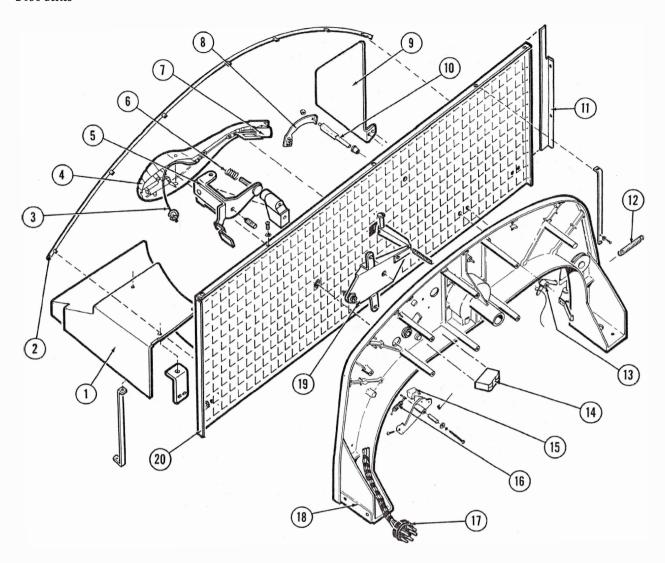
TOP SUPPORT CASTING ASSEMBLY
